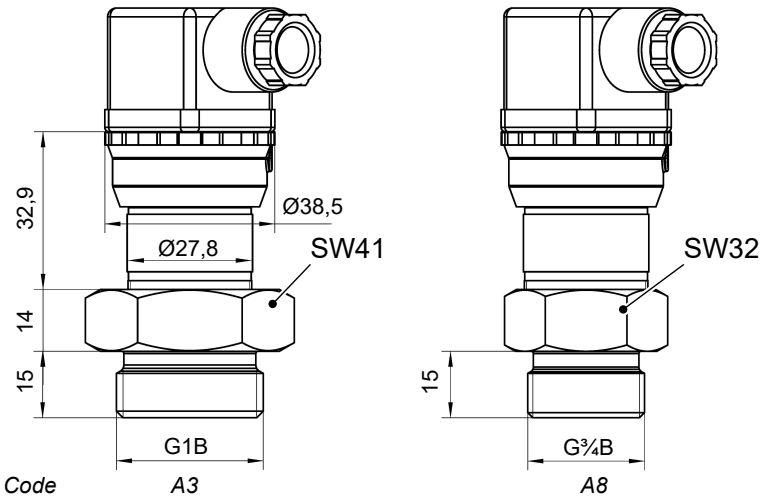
Dimensional drawing 'almost front-flush sensor'
